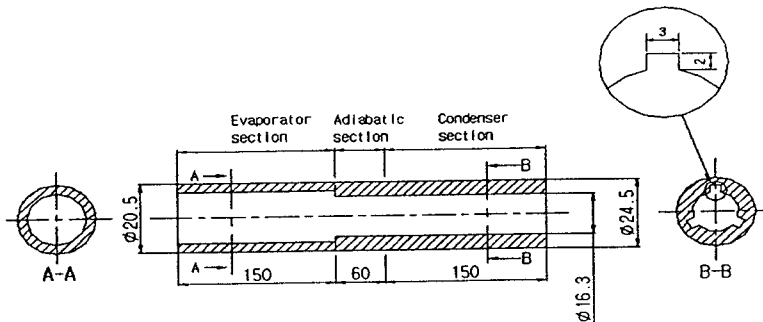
Longitudinal cross section of a rotating heat pipe with grooves.
